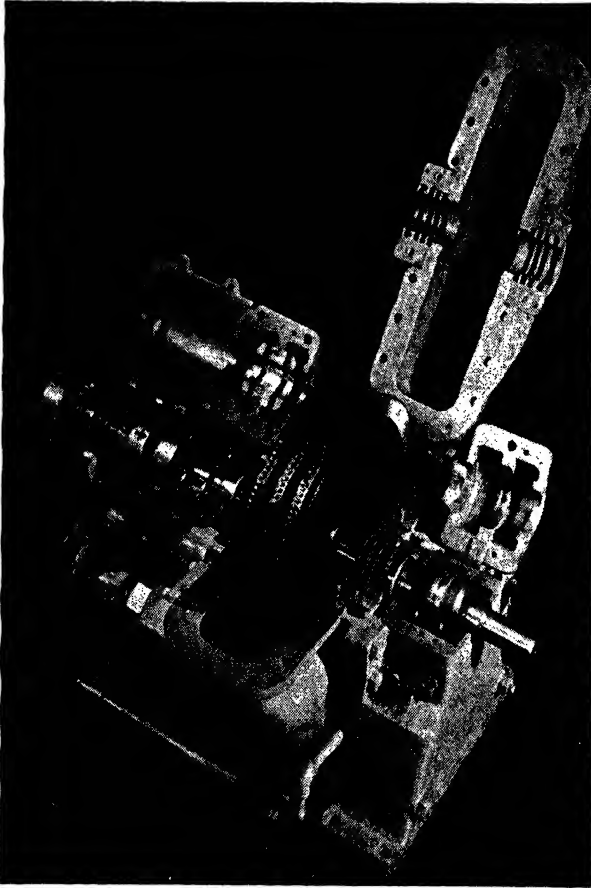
Turbine of Figure 14-25 with top casings removed. Note the three wheels of the three-velocity Curtis-type blading, governor at left, nozzles and reversing blades in lower part of the casing. (Courtesy Elliott Co.)
